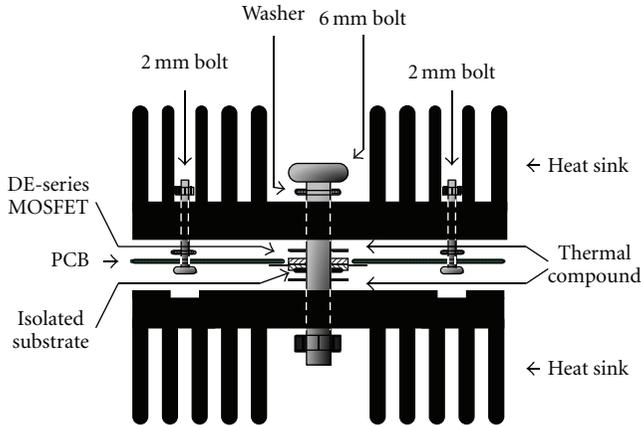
Bisink technique for mounting MOSFETs using two heatsinks.
